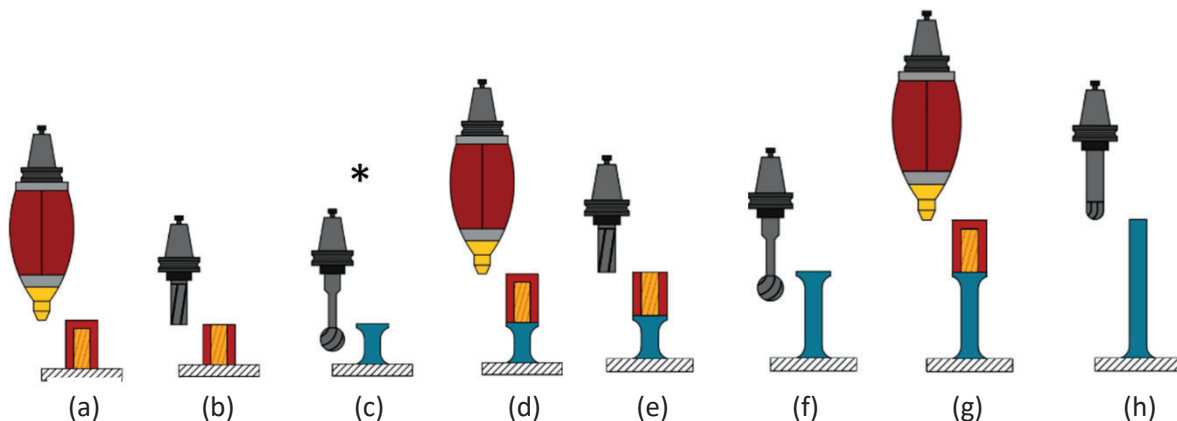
Overview of iterative machining illustrating a 3 segment incremental machining process
